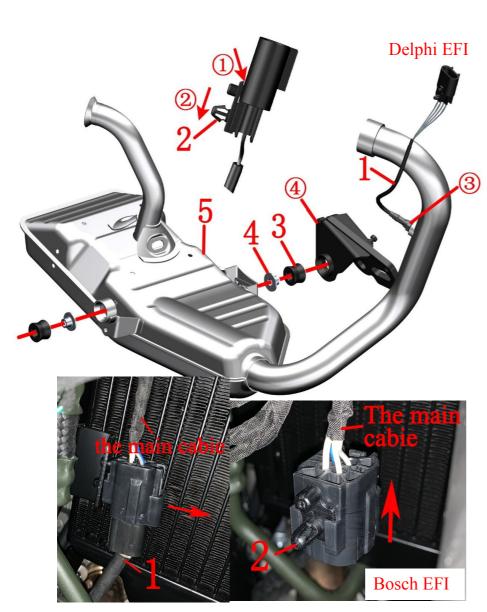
MUFFLER COMPONENT		Muffler front assembly 2	CHK	(0)
